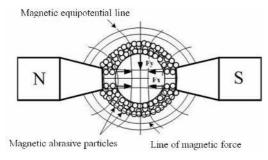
Two dimensional magnetic forces operating on the workpiece.
